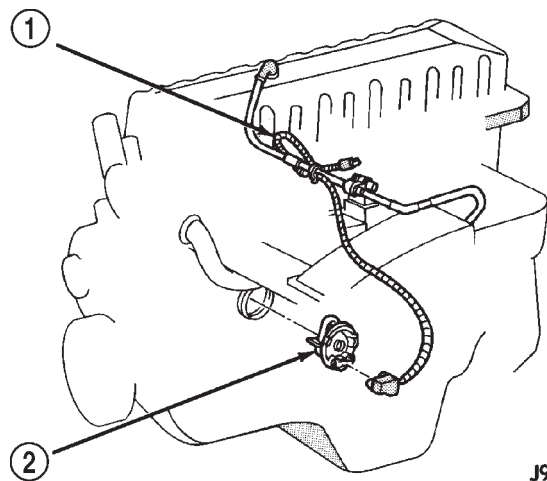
Heater and Cord—4.0L 6-Cylinder Engine
